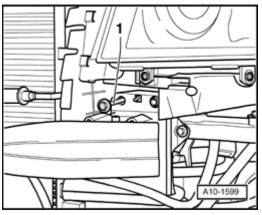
Removing/Installing Crankshaft Holder 3242 Into Hole
